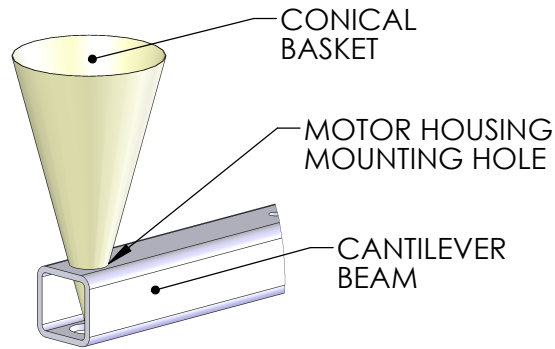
Conical basket lowered into the motor housing mounting hole
